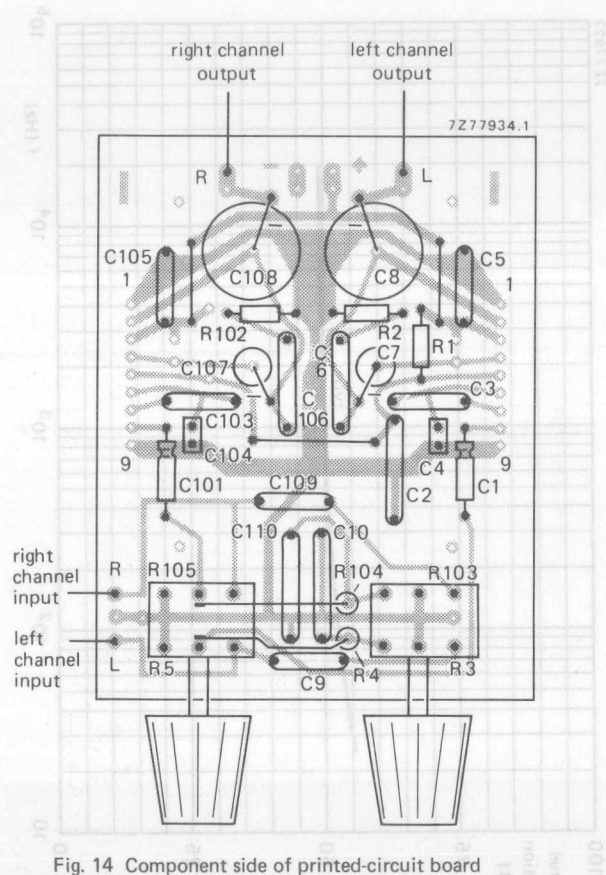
Component side of printed-circuit board showing component layout used for the circuit of Fig. 12. Balance control is not on the p.c. board.
